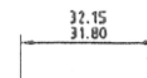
Linear dimension toleranced by specifying limits of size directly
